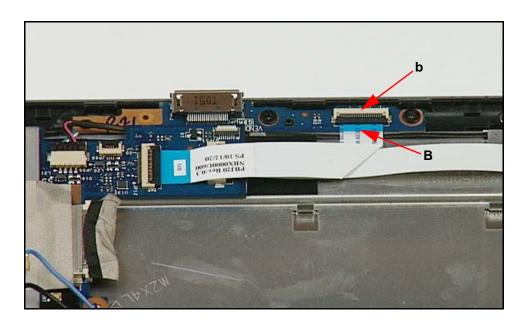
Disconnecting Docking Board FFC from Docking Board
